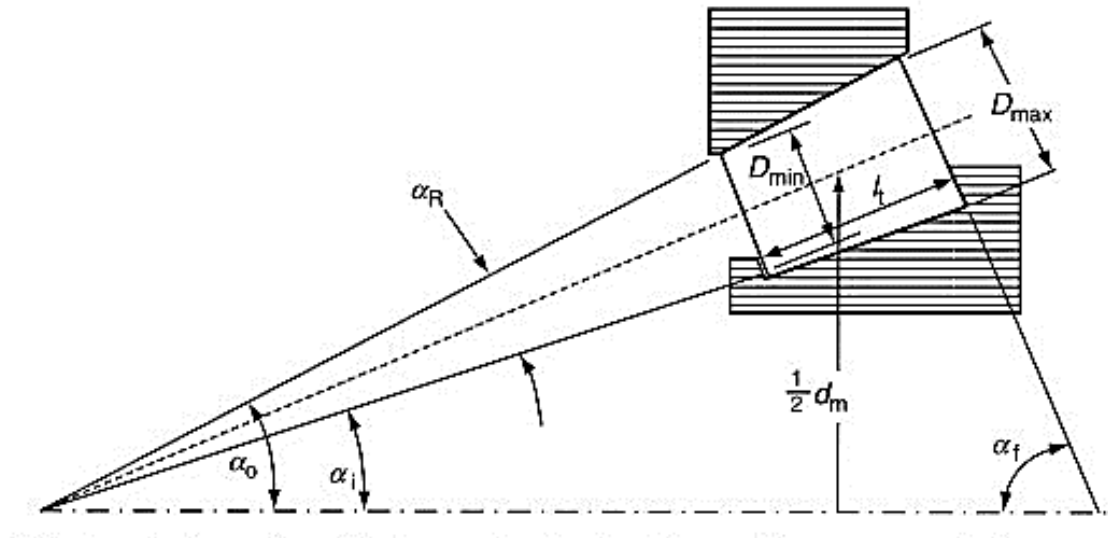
Internal dimension for tapered roller bearing performance analysis [8]
